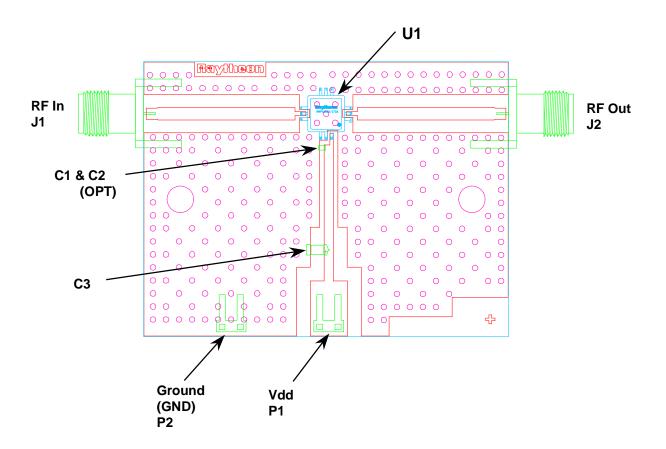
Layout and Assembly of Test Evaluation Board (RMLA3565-53-TB)
